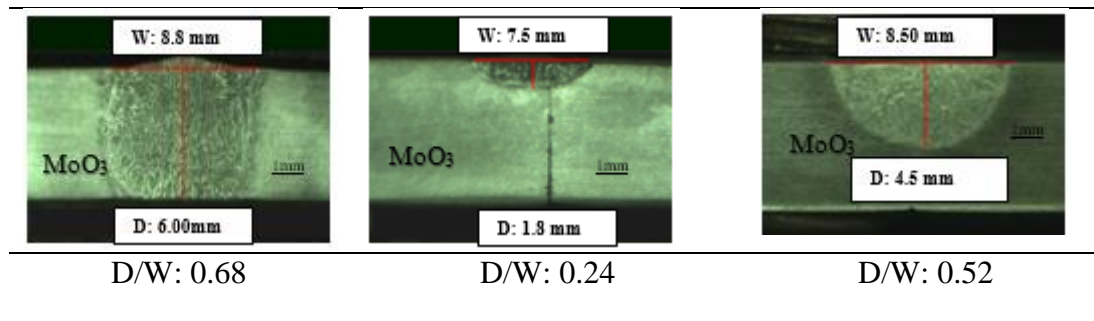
Welding current: 185 A, Torch speed 120 mm/min
